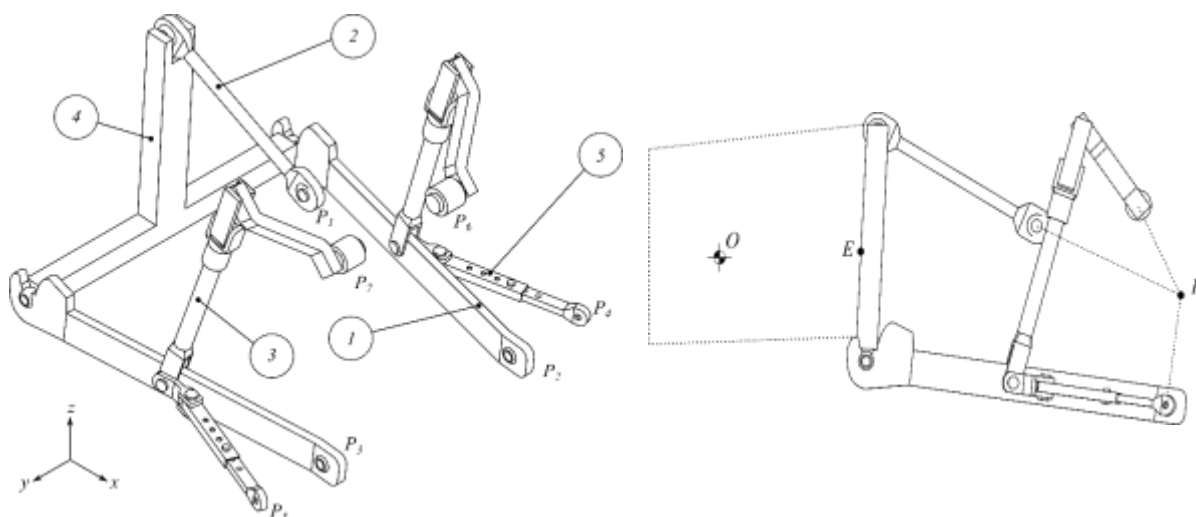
Rear three-point linkage and substructure model of the rear mounted machine.
